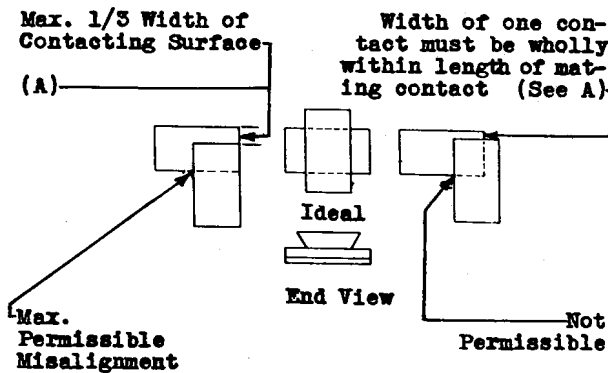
Alignment of Heavy Bar Contacts - Plan View of Contacting Surfaces
